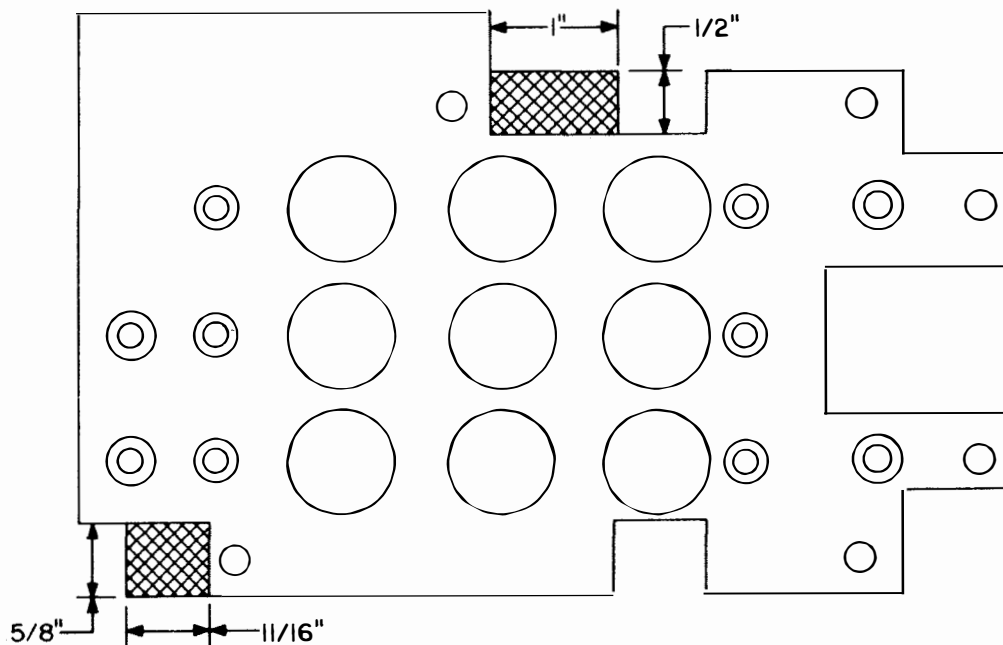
+5.75V SCR Heat Sink Mounting Plate.
